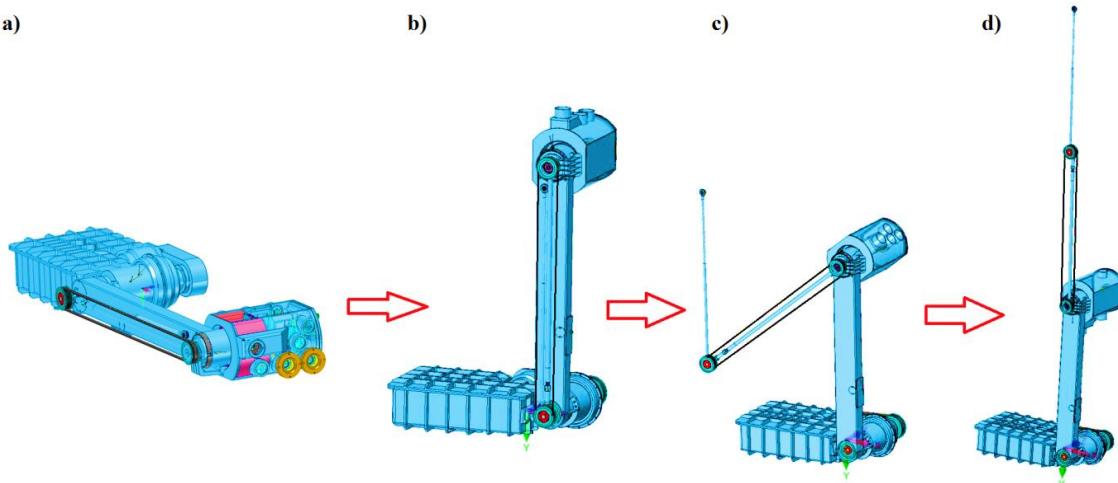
3D model of arm equipped with sensory cylinder and sensor mast.
